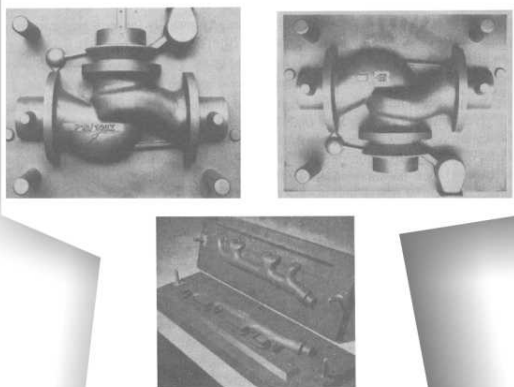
Typical epoxy resin pattern mounted on match-plates
